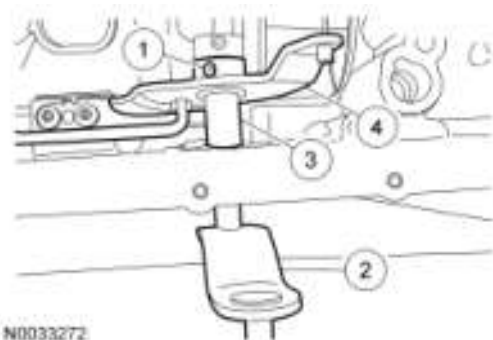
Identifying Manual Control Lever Shaft & Roll Pin
